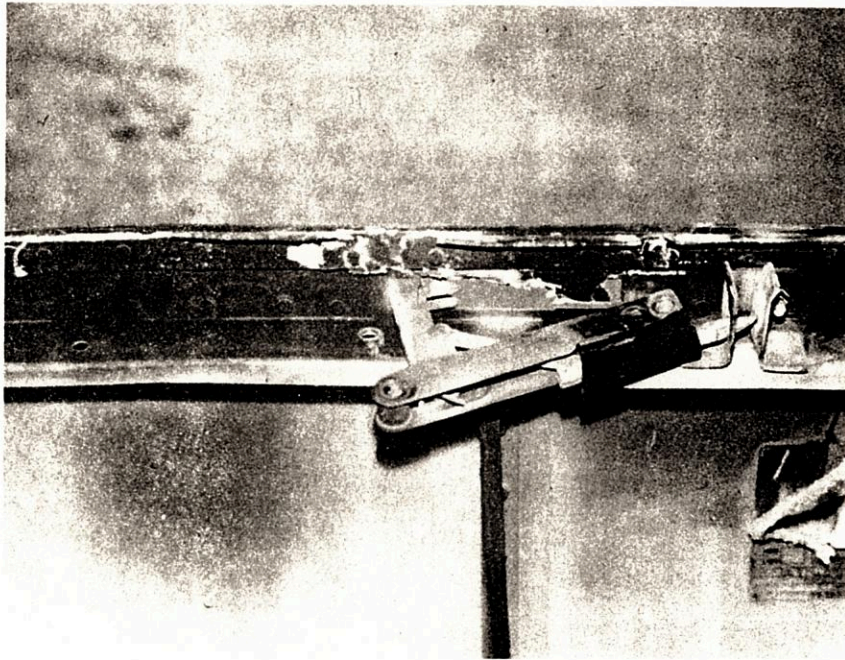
DAMAGED LATCH AND SEAM OF FORWARD STRUT FAIRING, INTERNAL LEFT SIDE VIEW
